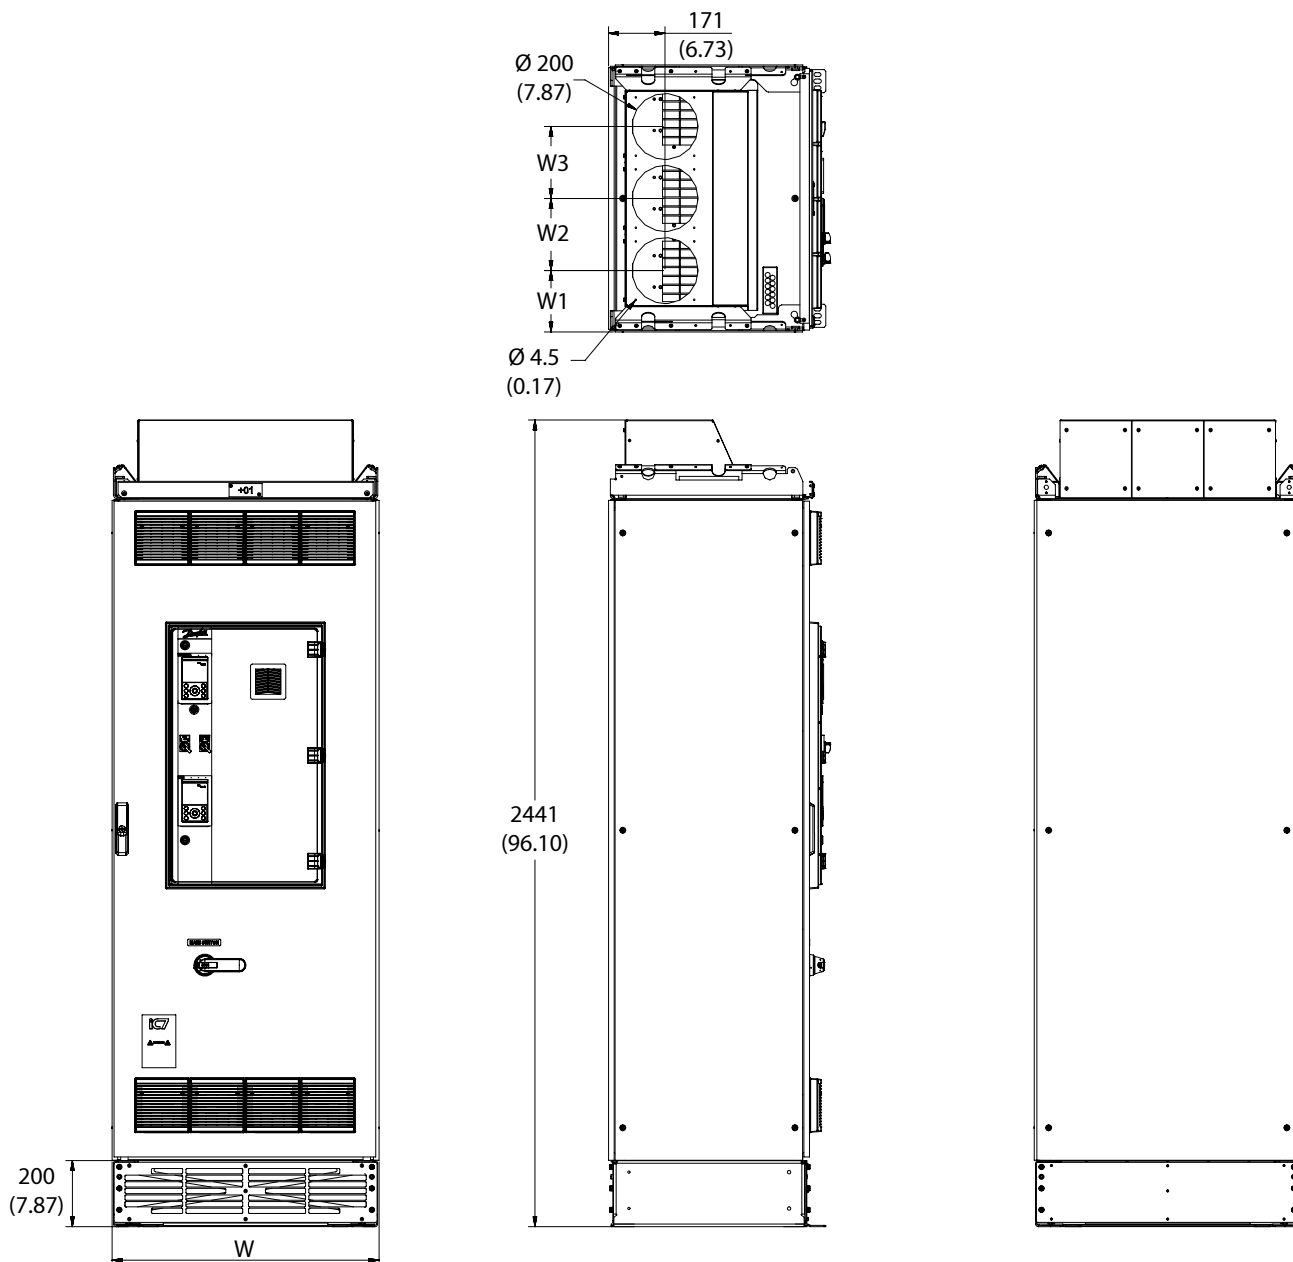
Dimensions for the Cooling Air Output Flange (+OAF), FE10, in mm (in)
